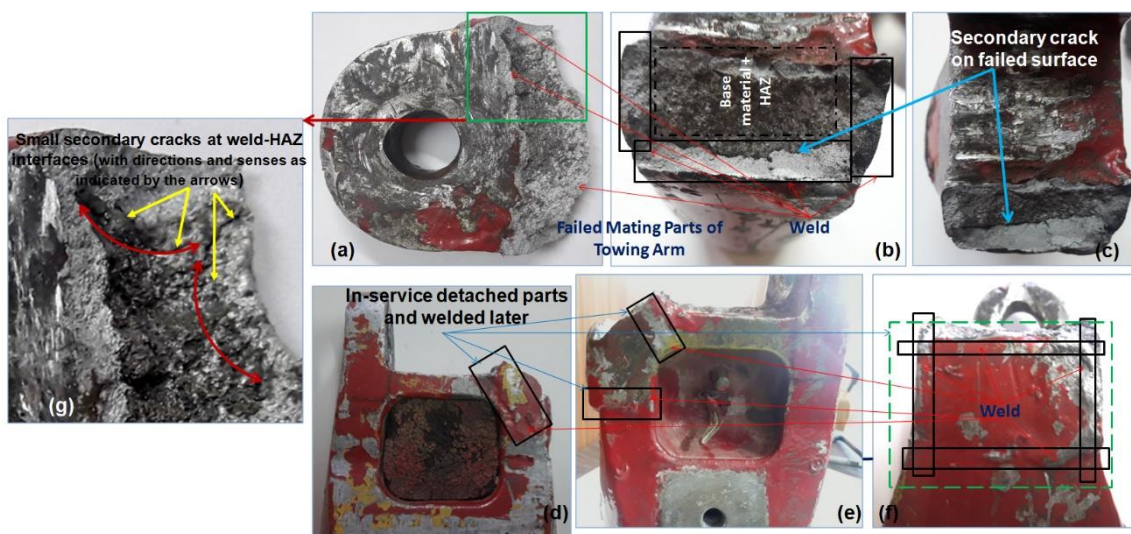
Photographs of fracture surfaces of towing arm fork end in various views
